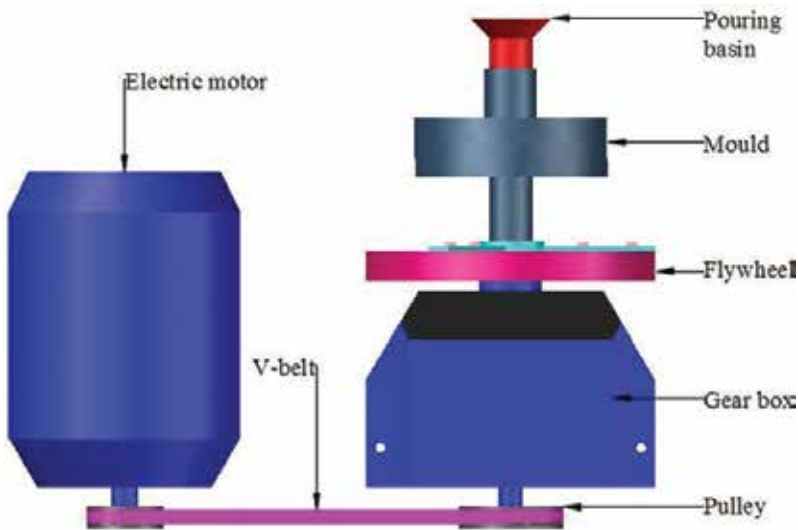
Schematic of a vertical centrifugal casting machine [46].
